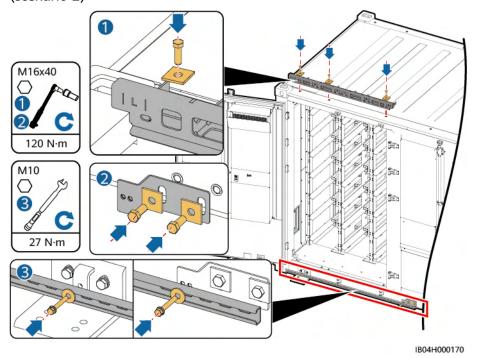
Installing the long top beam and the long bottom beam (scenario 1)
